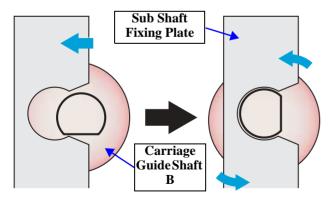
Reinstalling the Sub Shaft Fixing Plate
